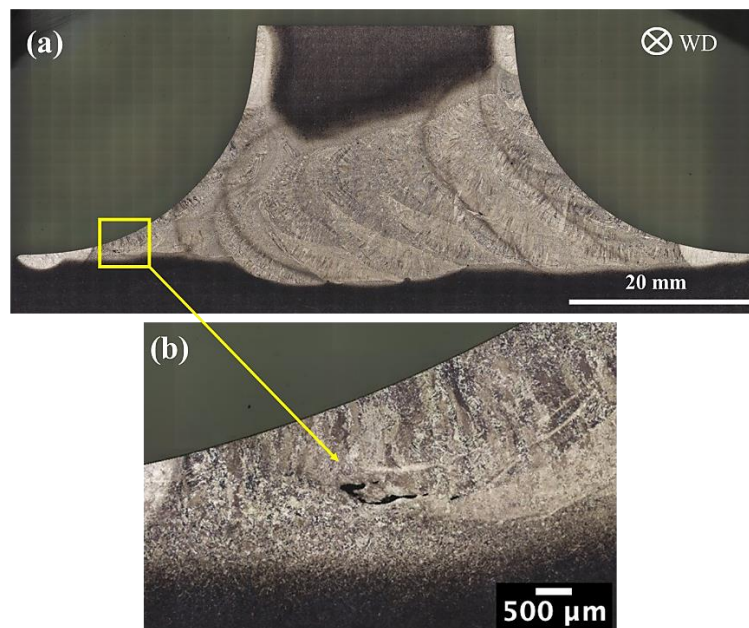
Macrographs of (a) a T-joint extracted weld sample and (b) the close view of a typical lack of fusion in 410NiMo welded material [23].
